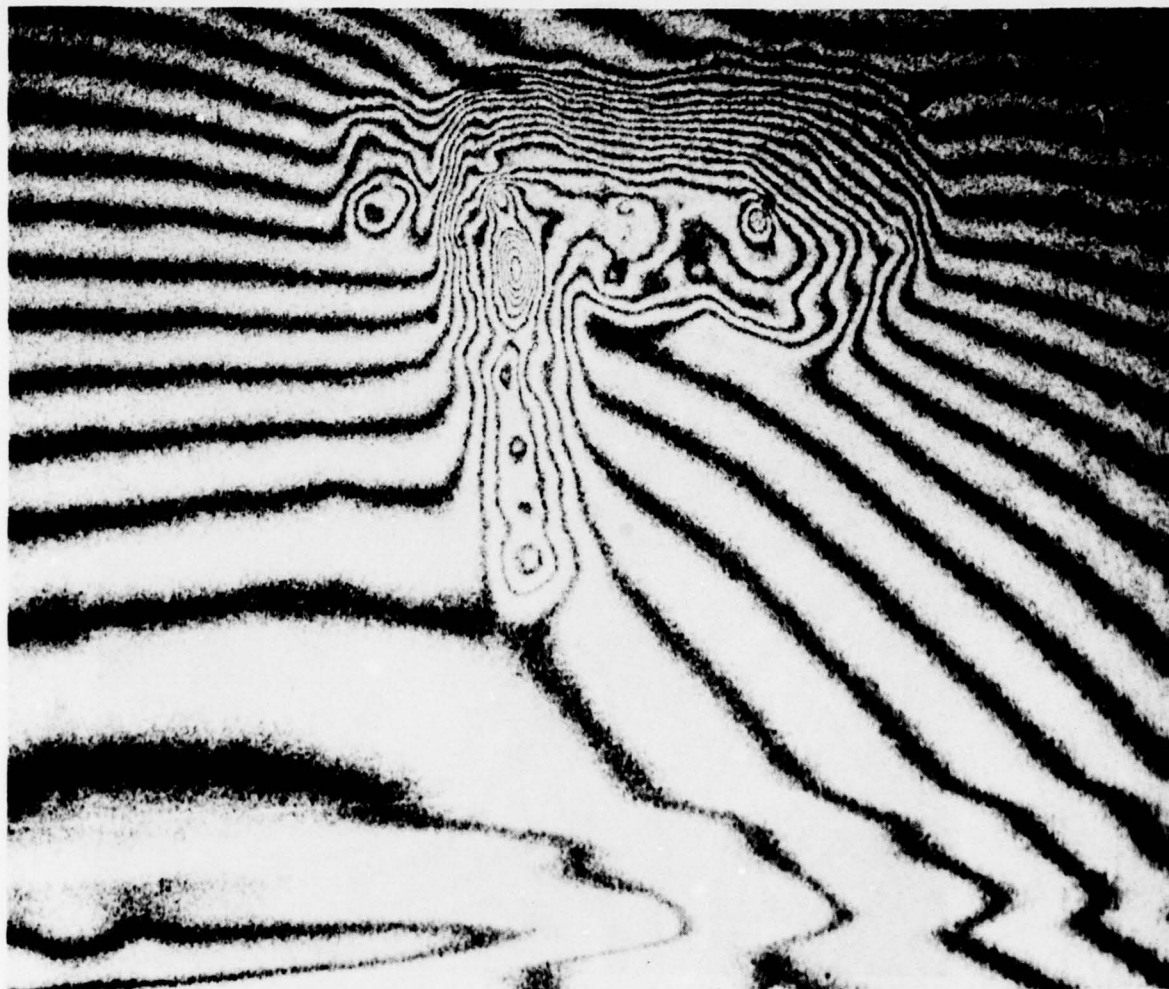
Holographic inspection pattern of the same damaged honeycomb sandwich panel of which in figure 13 a radiographic picture is shown. The area in which the honeycomb core is damaged by water and corrosion is clearly indicated.
